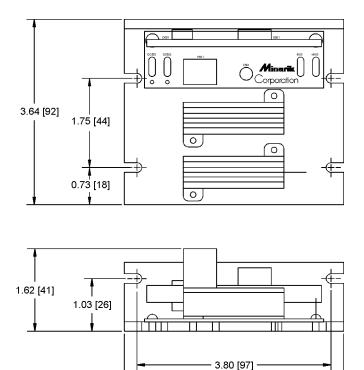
BOSS DB Regen Dump Circuit Dimensions
